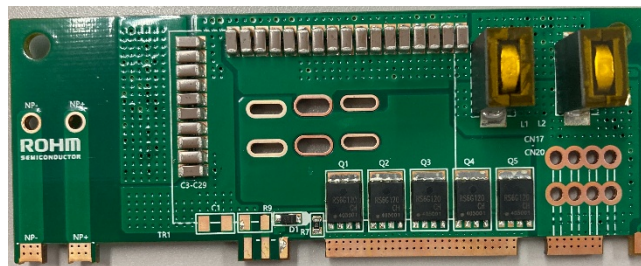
Secondary-side SR MOSFET Daughter Board (without transformer)
